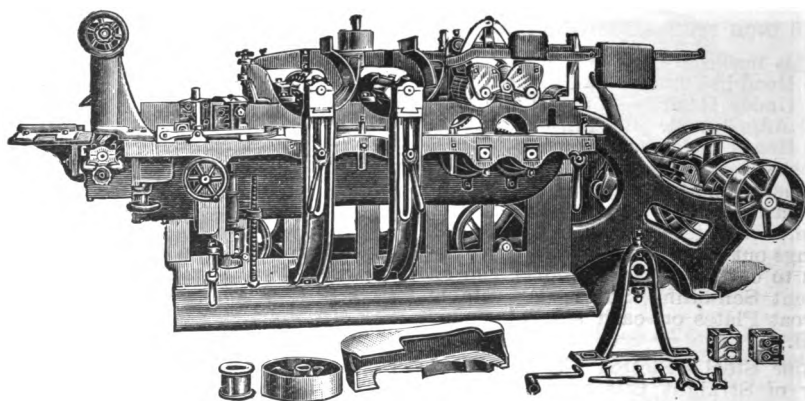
10 &amp; 12 INCH FOUR-SIDED MOULDER, WITH TWO TOP HEADS.
